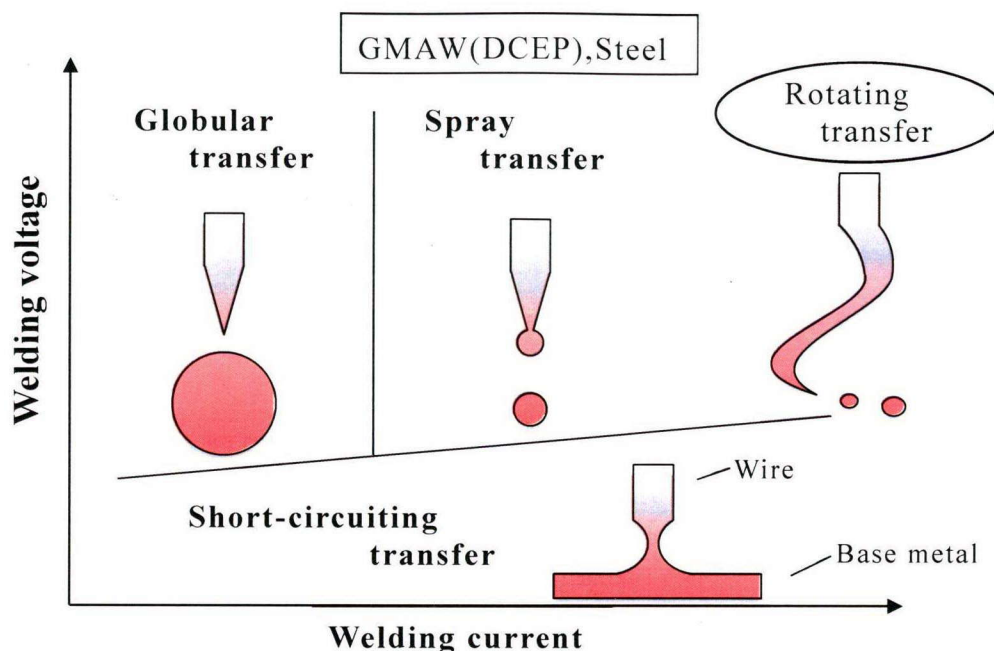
Metal transfer mode in GMA welding.
